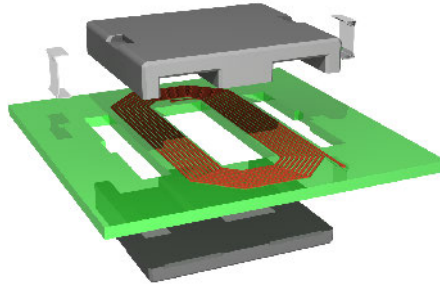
Drawing of a planar component. The magnetic core is clamped around PCB winding [30].
